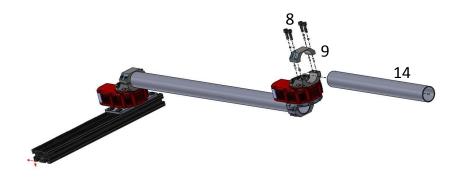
Attaching the Second Link to the Assembly in Fig. 7 Repeat the step shown in 5 to a new Hebi Actuator.
